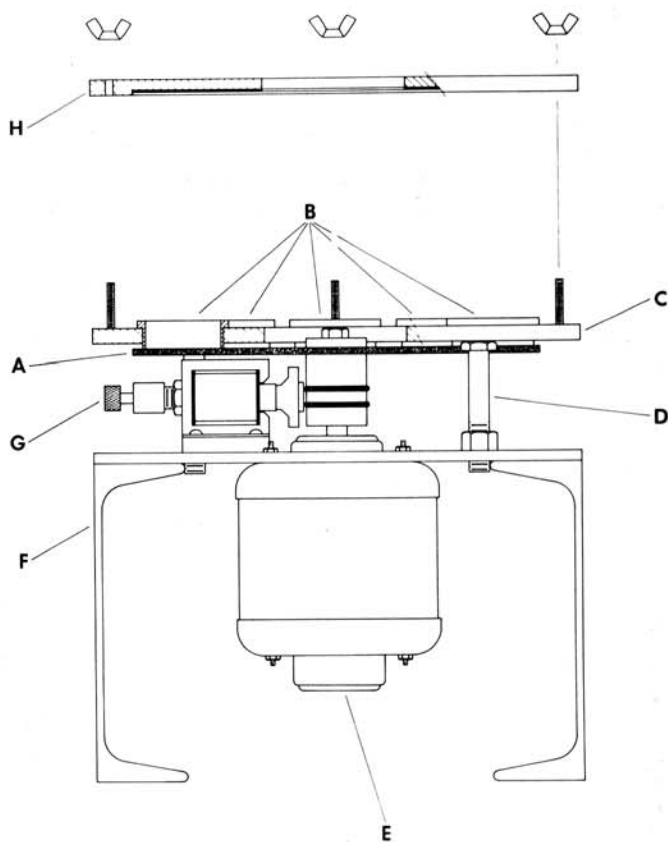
The TADD. A, Resinoid disk; B, sample cups; C, head plate; D, head plate supports; E, motor; F, stand; G, solenoid; H, cover plate.
